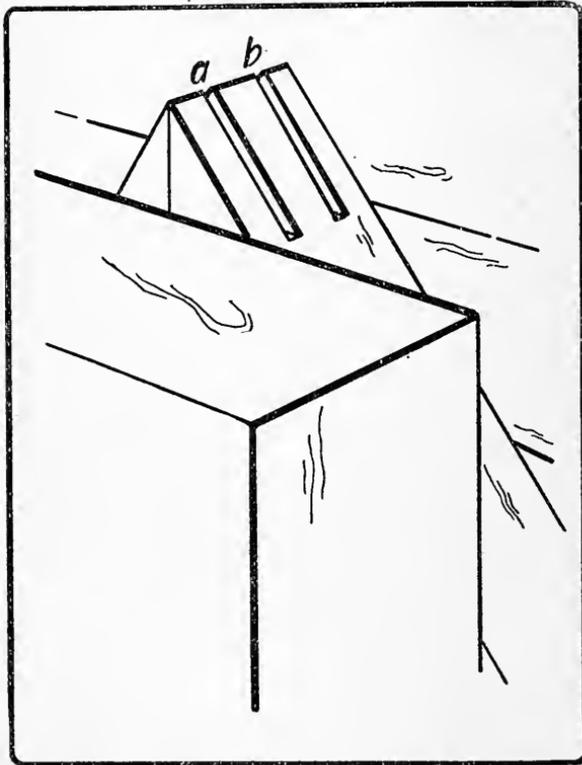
Kerfs cut in corners of picture frame to receive slip-feathers.
